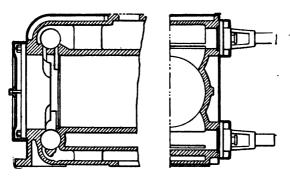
Corliss cylinder with protection for heated surfaces.
